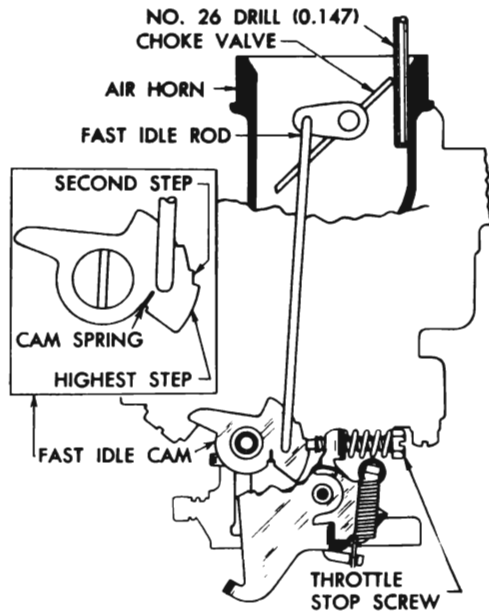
Stromberg Fast Idle Cam Adjustment
